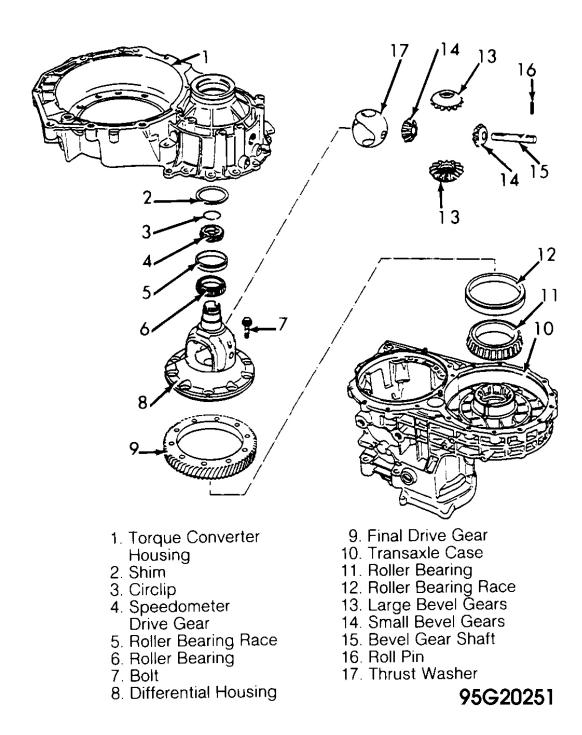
Exploded View Of Differential Assembly Courtesy of VOLKSWAGEN UNITED STATES, INC.
